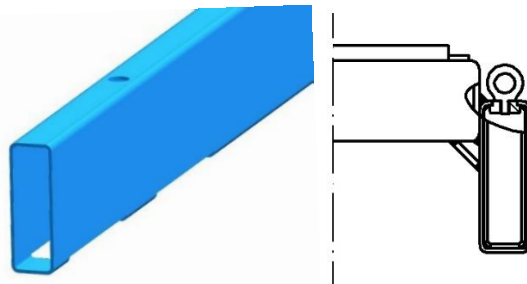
Side profiles for the weldment structure (left) and eye bolt placement (right).
